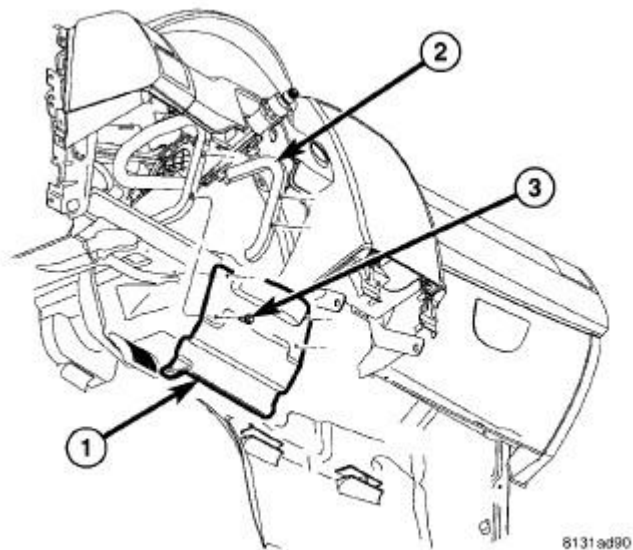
REINFORCEMENT INSTRUMENTAL PANEL STEERING COLUMN
